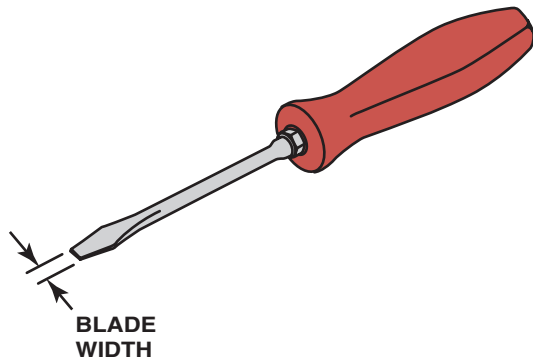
A flat-tip (straight-blade) screwdriver. The width of the blade should match the width of the slot in the fastener being loosened or tightened.
